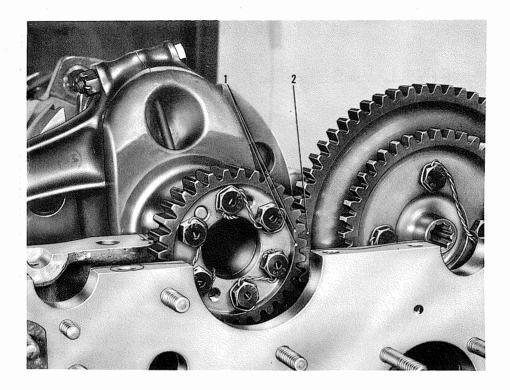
Left Crankcase and Shafts Assembled on Stand.
